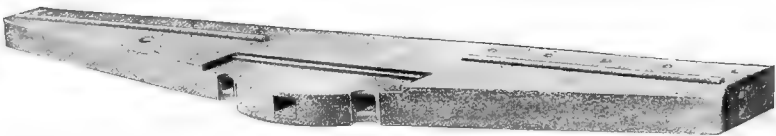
Commonwealth Steel Company's Cast Steel Combined End and Buffer Sill.
